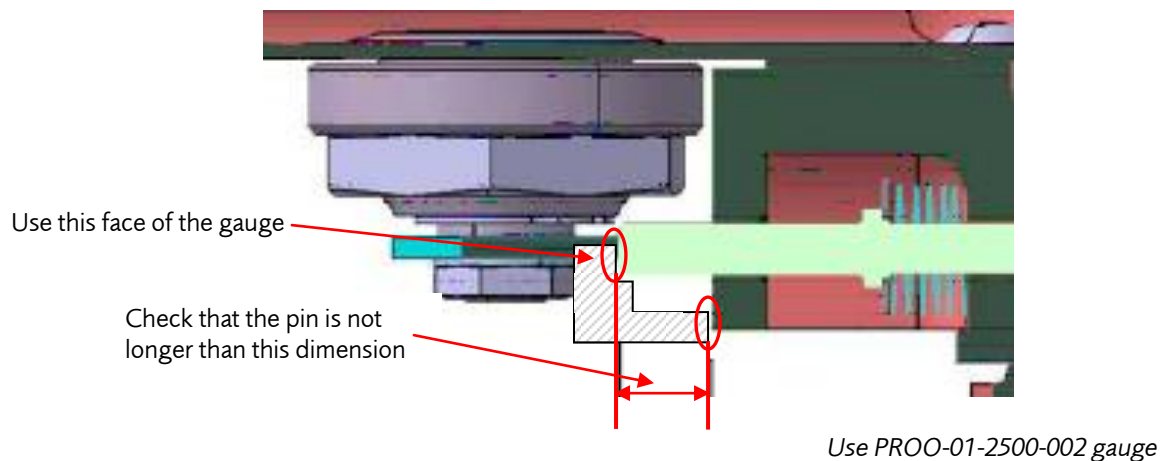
Maximum dimension for Retracted locking Pin Gauge.
